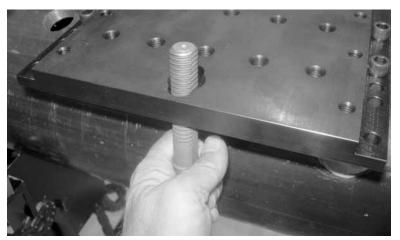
Insert the threaded end of the clamping chain through the hole in the saddle.
